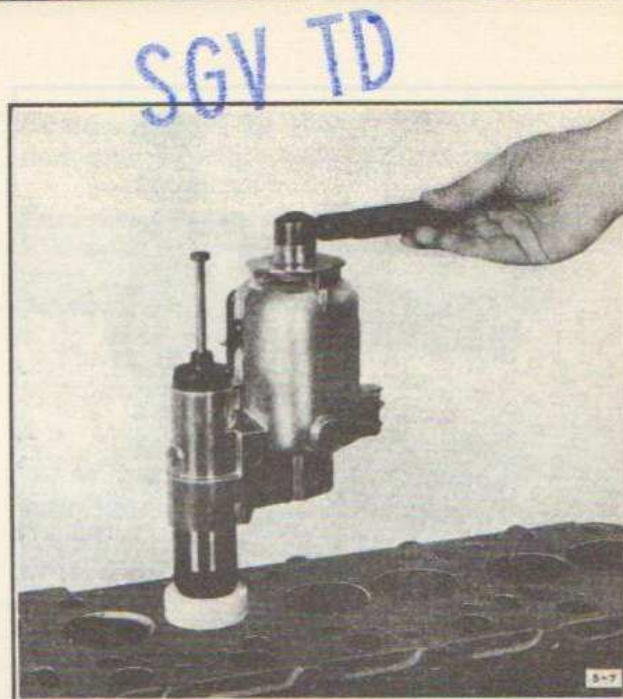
Reconditioning Insert with Motor-driven Grinder
